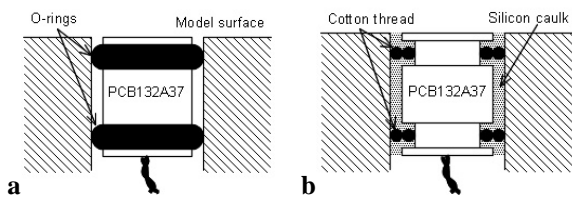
Schematics of pressure transducer installation on the model surface. a:Left-hand figure is a standard installation of PCB132A37 with o-rings. b:Right-hand figure shows the modified installation with cotton threads and silicone caulk.
